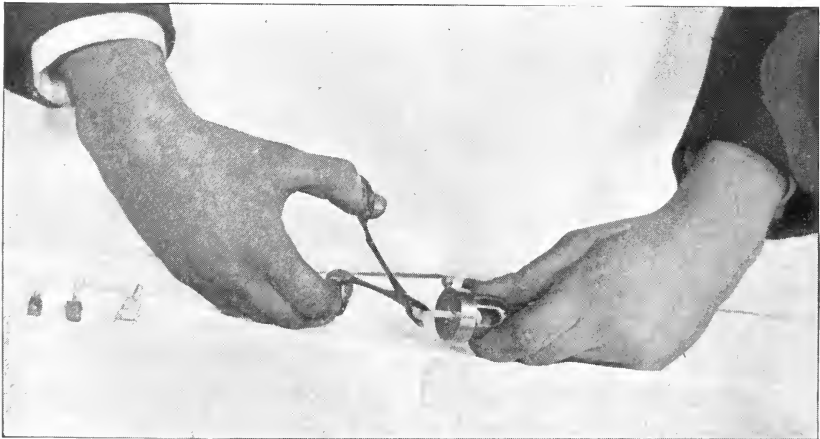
Cutting a thread on a bone pin. Fresh bone is less likely to chip.
